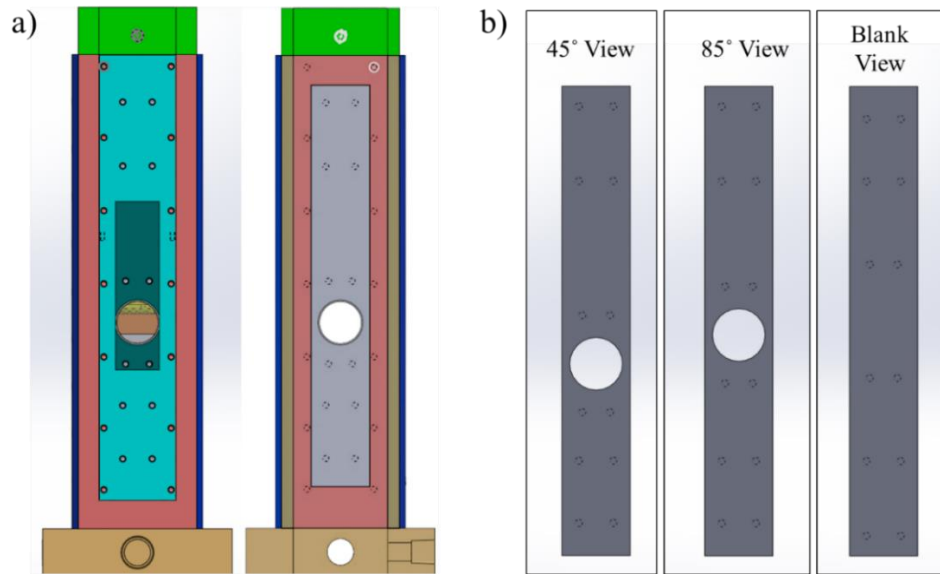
a) Assembled IR viewport (front and back) b) Bottom plate designs viewport designs.
